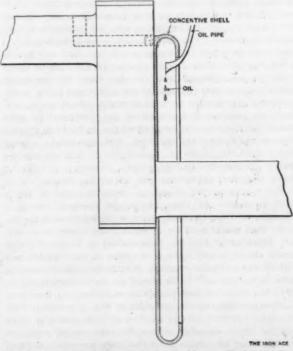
An Oiling Arrangement Applicable to a Horizontal Open
